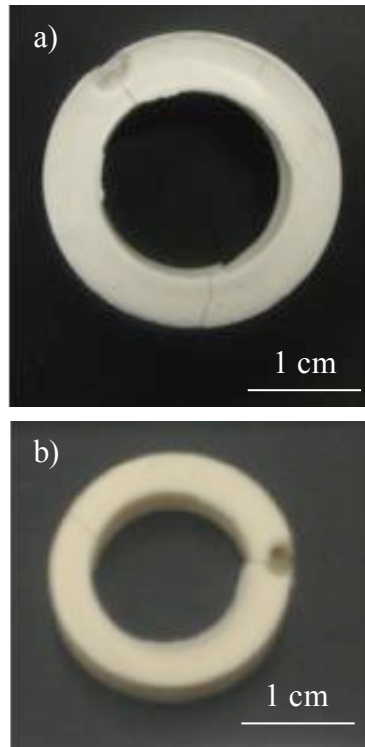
An alumina CeraSGel specimen exhibiting crack and air bubble formation a) before binder burnout and b) after binder burnout and sintering.
